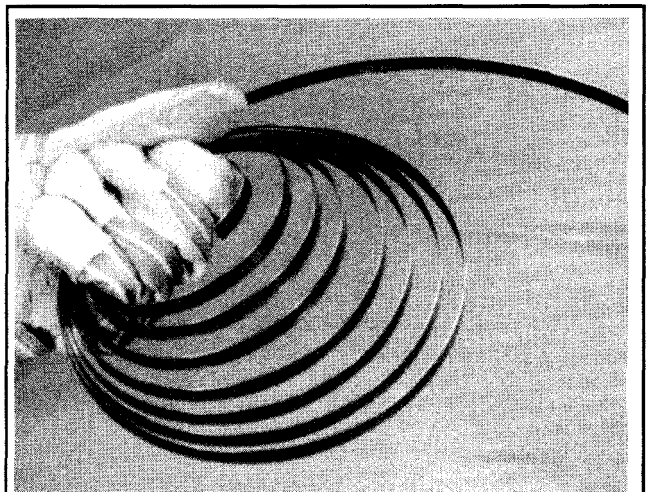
Inspect the spring for wear, damage or corrosion—handle with care
